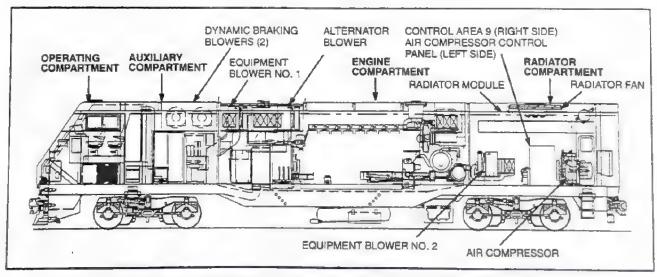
LOCATION OF EQUIPMENT, DYNAMIC BRAKING AND ALTERNATOR BLOWERS AND RADIATOR COMPARTMENT EQUIPMENT, E-42577.
